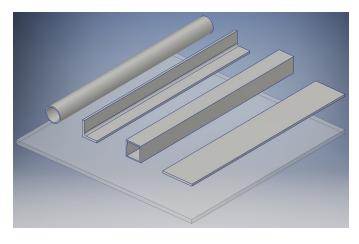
CAD models of several stock shapes: aluminum round tube, angle, square tube, and flat bar; and polycarbonate sheet
